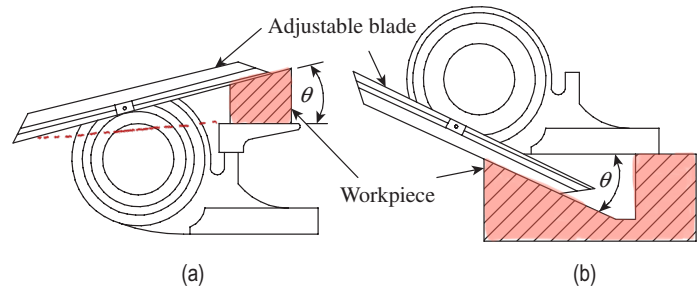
Measurement of angles using bevel protractor (a) Acute angle attachment (b) Inside bevelled face angle measurement
